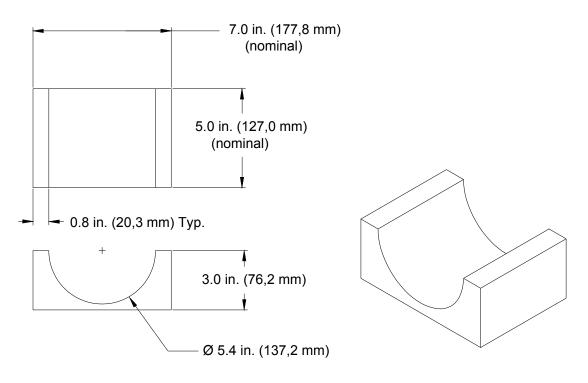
Horizontal Stator and Housing Assembly Support Fixture
